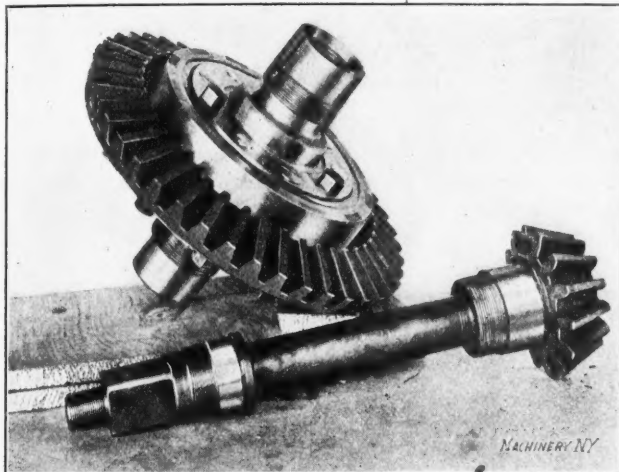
The Equalizing Gear Complete, with Bevel Gear and Pinion, as used in the Stevens-Duryea Automobile
